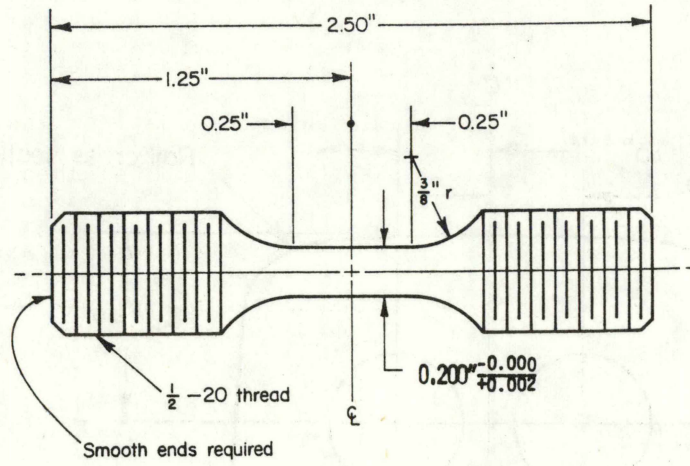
TRANSVERSE RAIL UNIAXIAL FATIGUE TEST SPECIMEN
